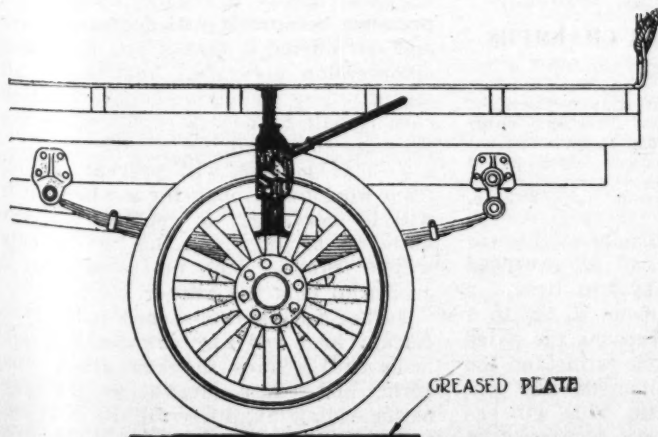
Placing jack between axle and body. The jack should be raised, thus springing the wheels downward until the tire just touches the greased plate placed purposefully in position
